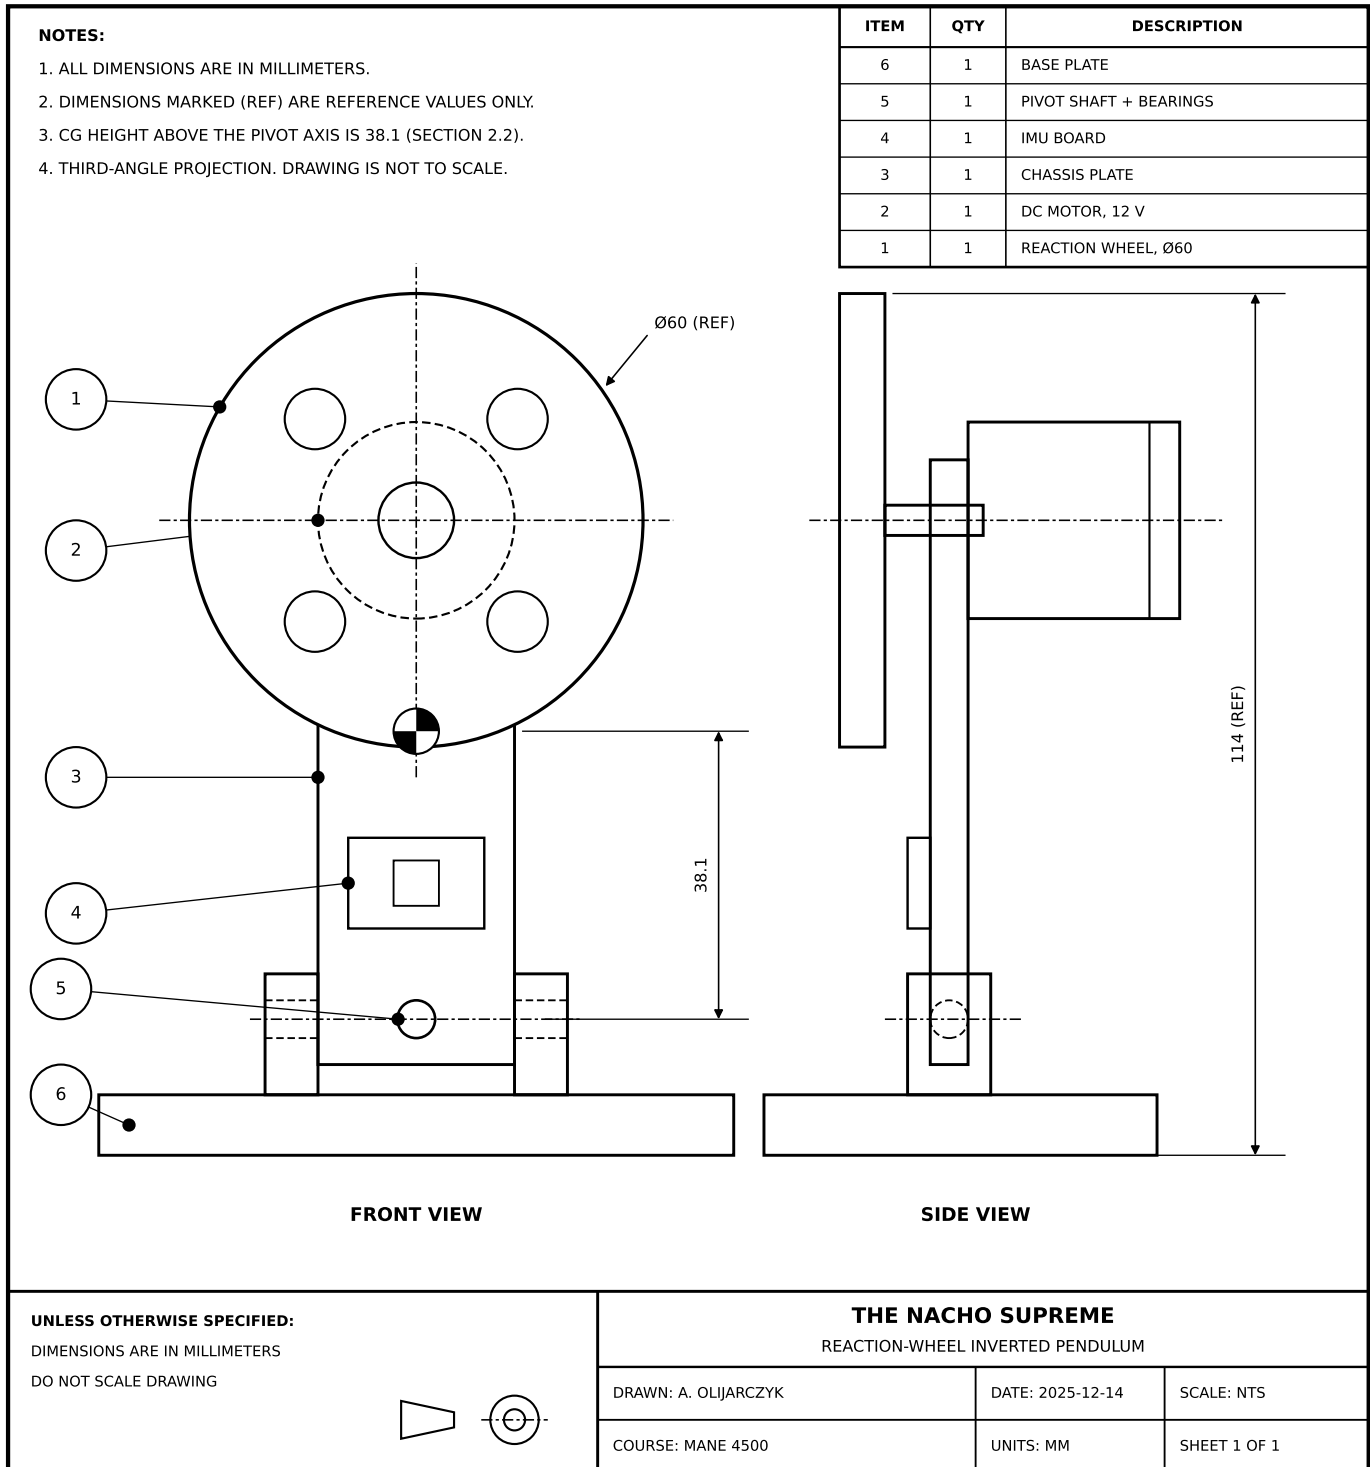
Two-view reference drawing of the “Nacho Supreme” assembly.
